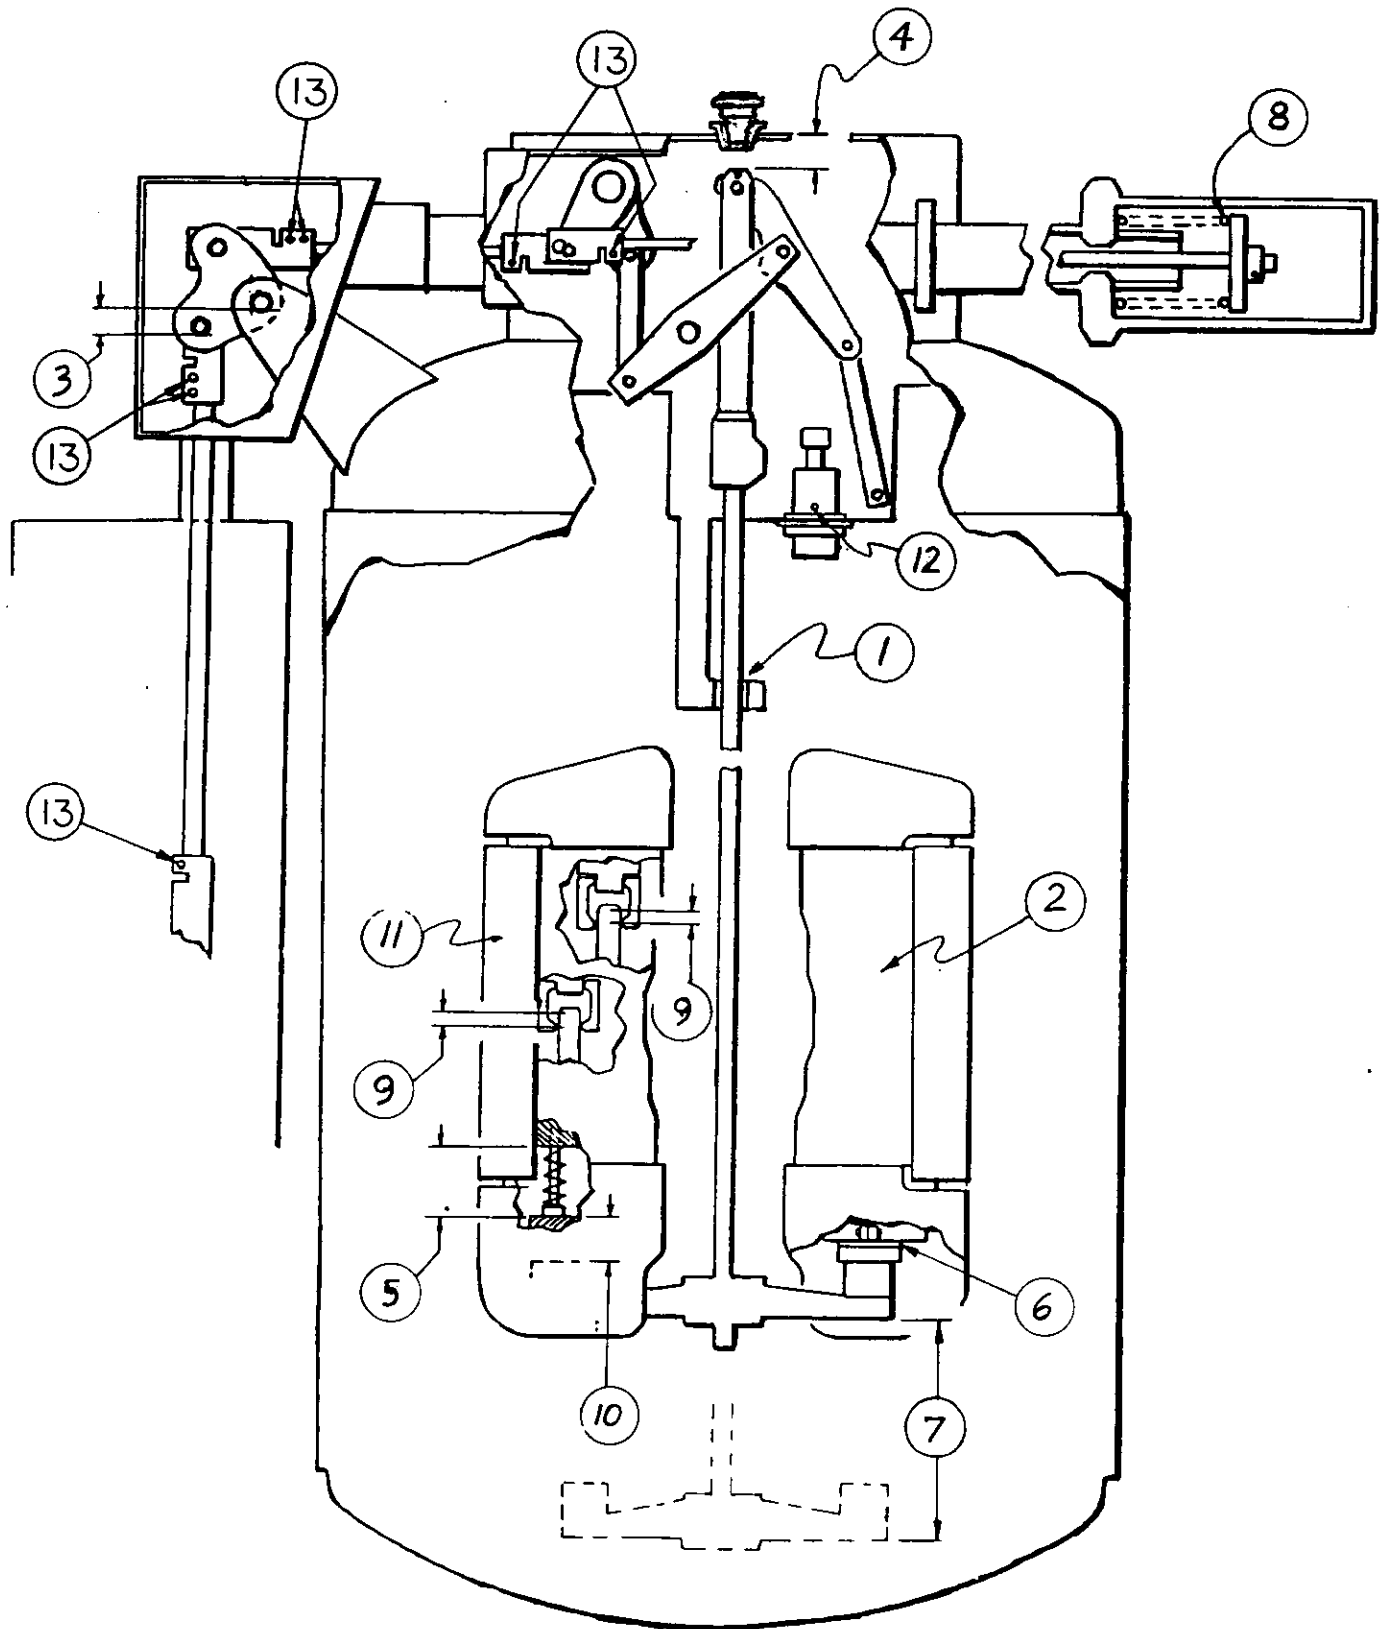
Physical Location of Breaker Adjustments and Check Points
